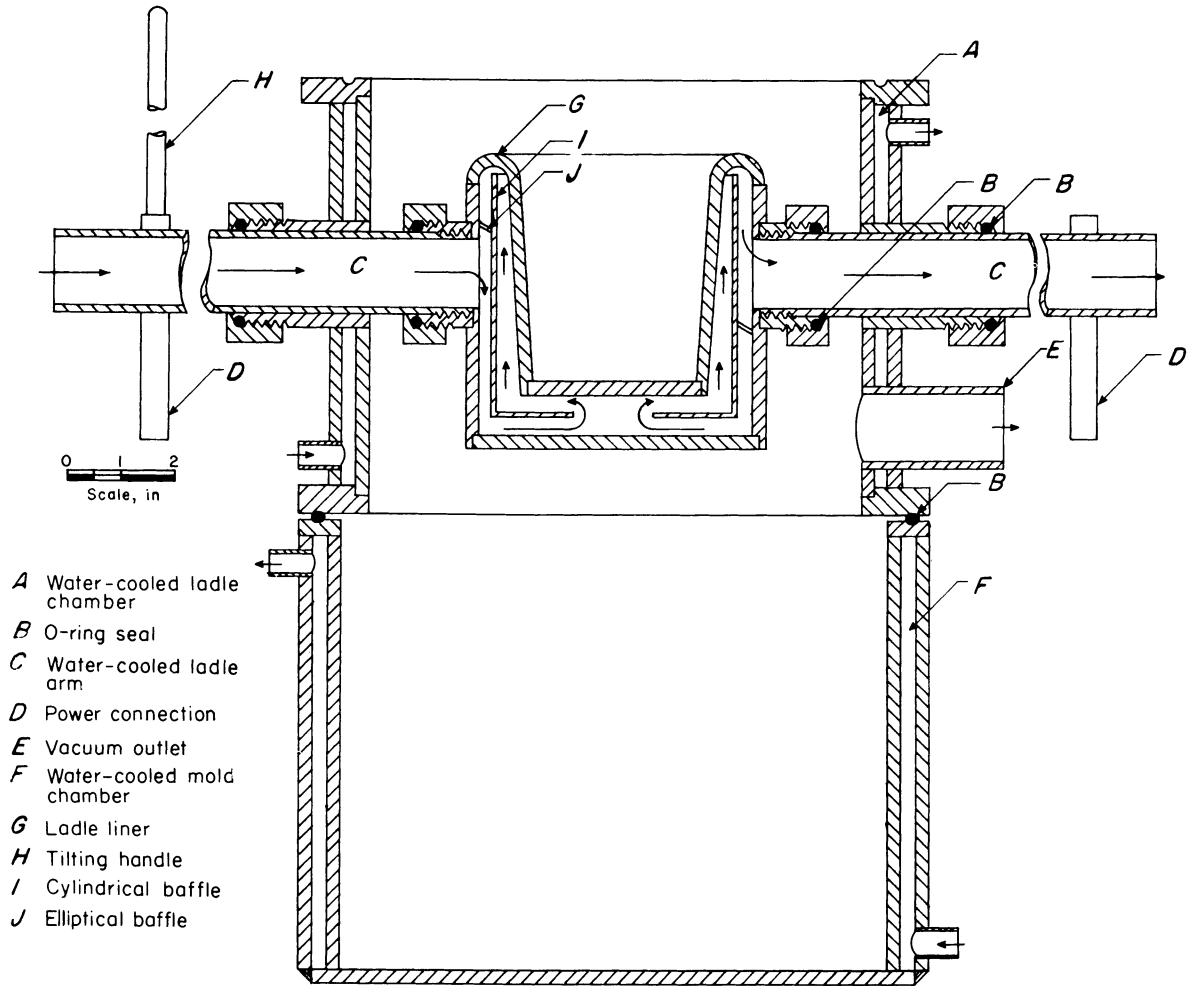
Ladle, ladle chamber, and mold chamber (laboratory-scale casting furnace).
